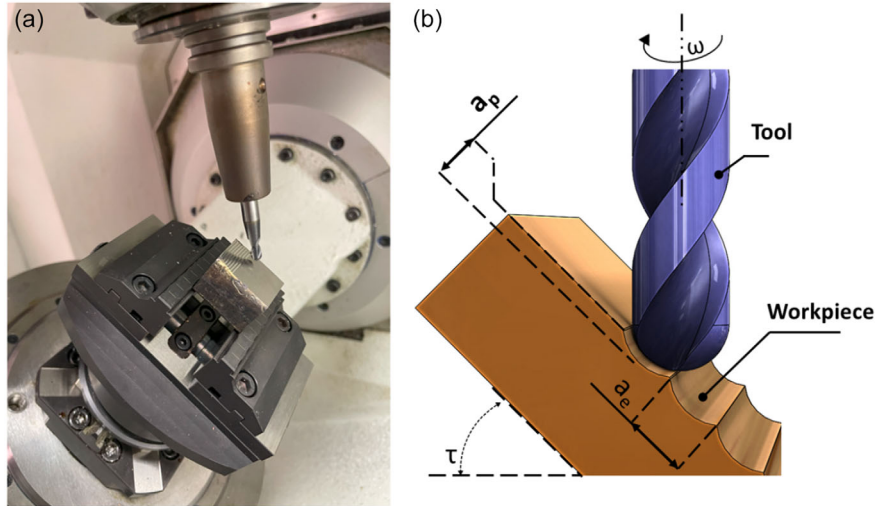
Experimental setup for optimal milling experiments on a 5-axis machining center: a) overview and b) schematic for cutting conditions and tool tilting.
